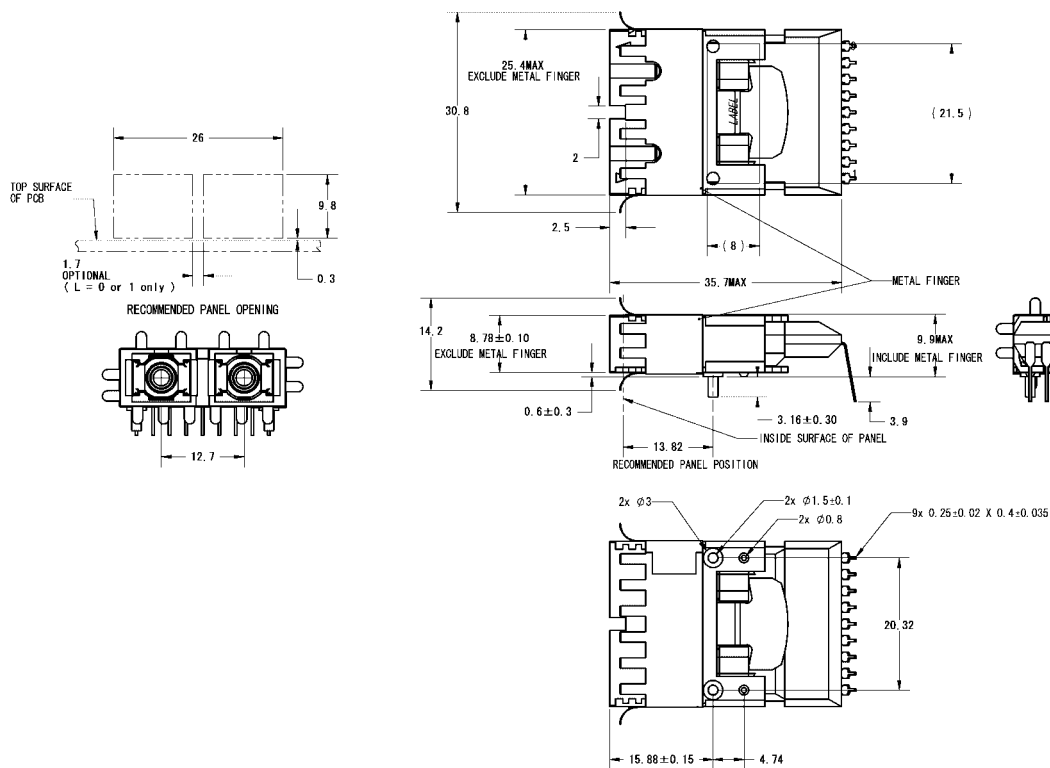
Outline Dimensions (SCM7104-GC-GN)
